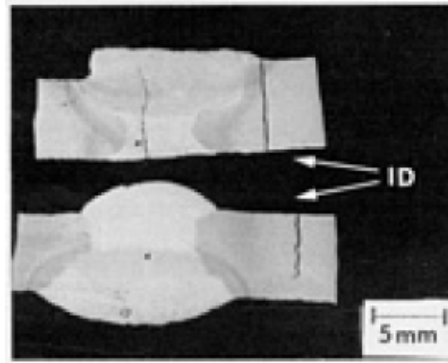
CROSS SECTIONS OF PIPE-TO-ELBOW WELDS SHOWING STRESS-CORROSION CRACKS ORIGINATING FROM THE INSIDE SURFACE OF THE WELD METAL AND THE BASE METAL
